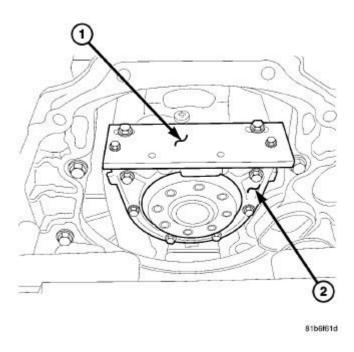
Front And Rear Seal Tool Installed Onto Rear Oil Seal Carrier Courtesy of CHRYSLER LLC
